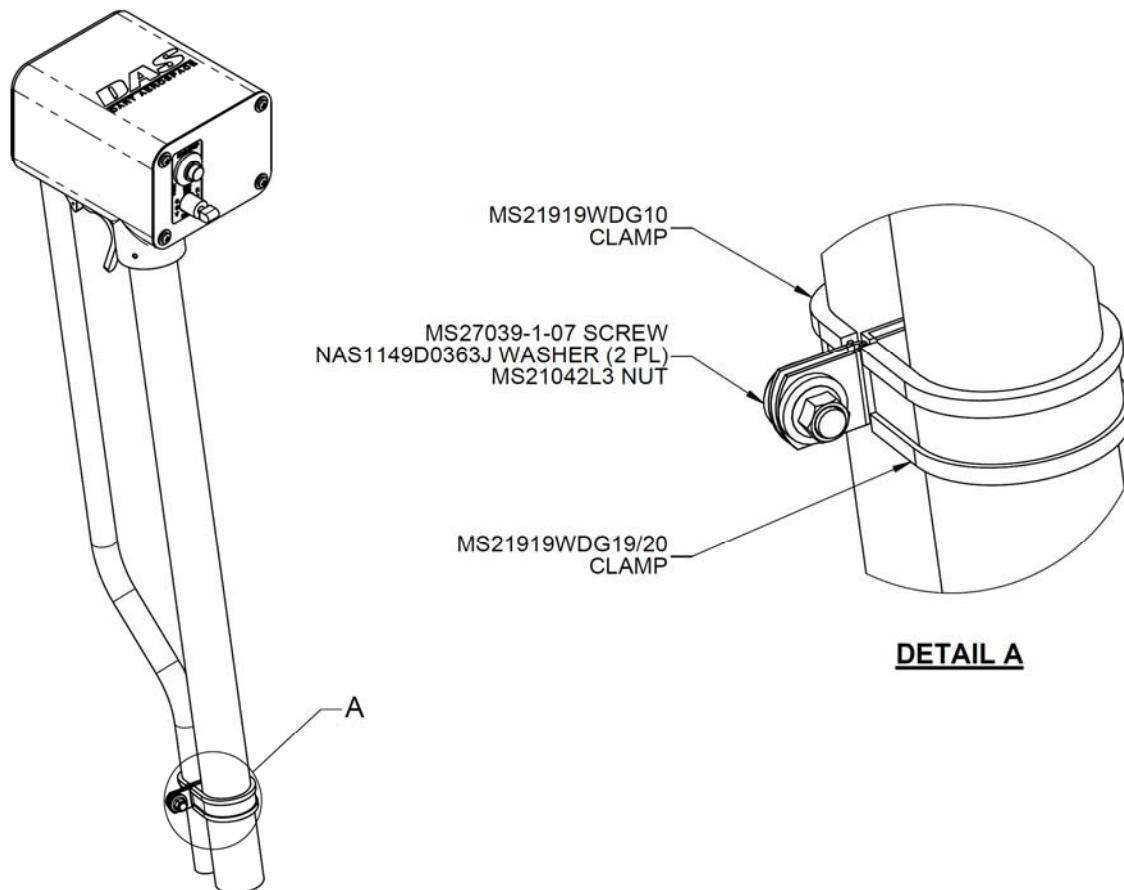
DXXX-803-XXX Wiring Conduit Clamp Detail
